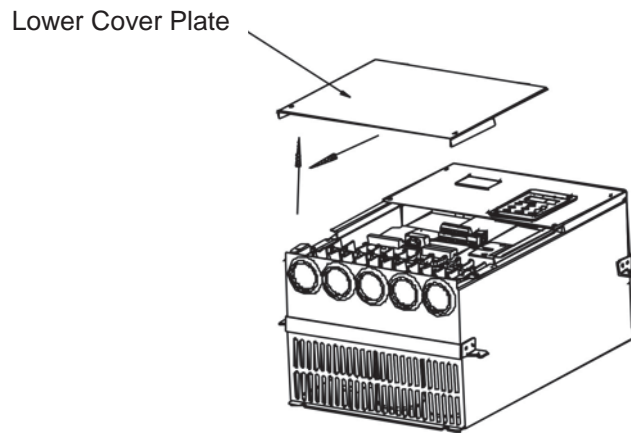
Removal of Lower Cover of the Sheet-Metal Enclosure
